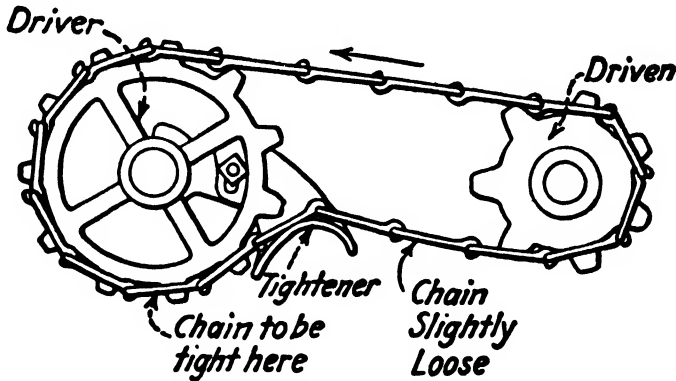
The proper method of running a hook-link chain on sprockets.
